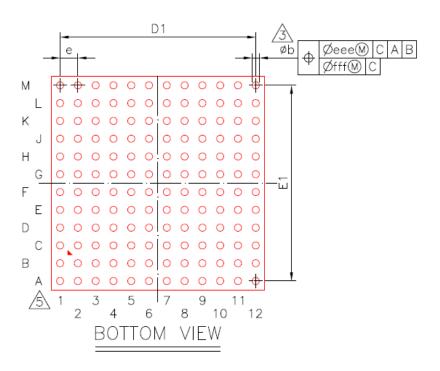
Package Outline Drawing of 144TFBGA 9x9mm<sup>2</sup>
